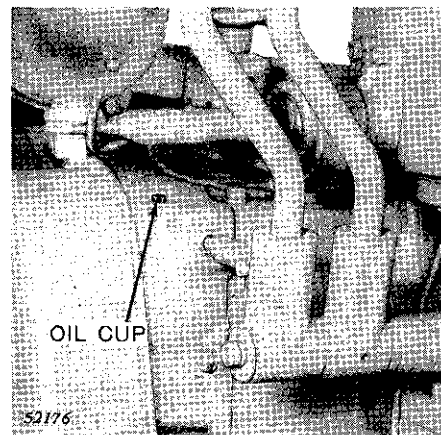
Cranking Engine Transmission Housing Oil Cup
